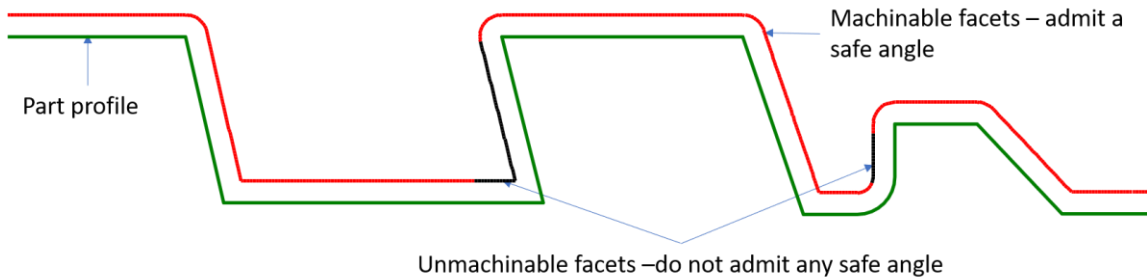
Sampled initial toolpath for a part profile with circular insert after finding safe angles. Machinable and unmachinable facets shown.
